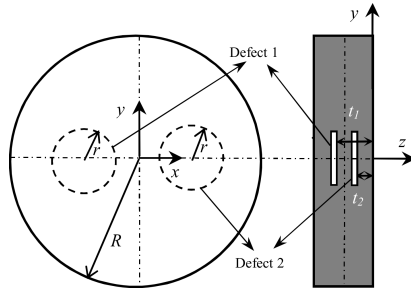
A schematic of the specimen with defects (left: frontal view; right: side view).
